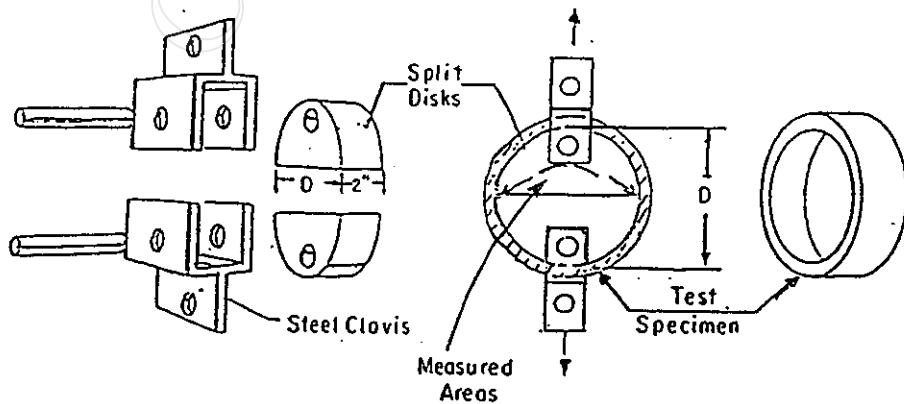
Test Fixture for Large Diameter Extruded Pipe
